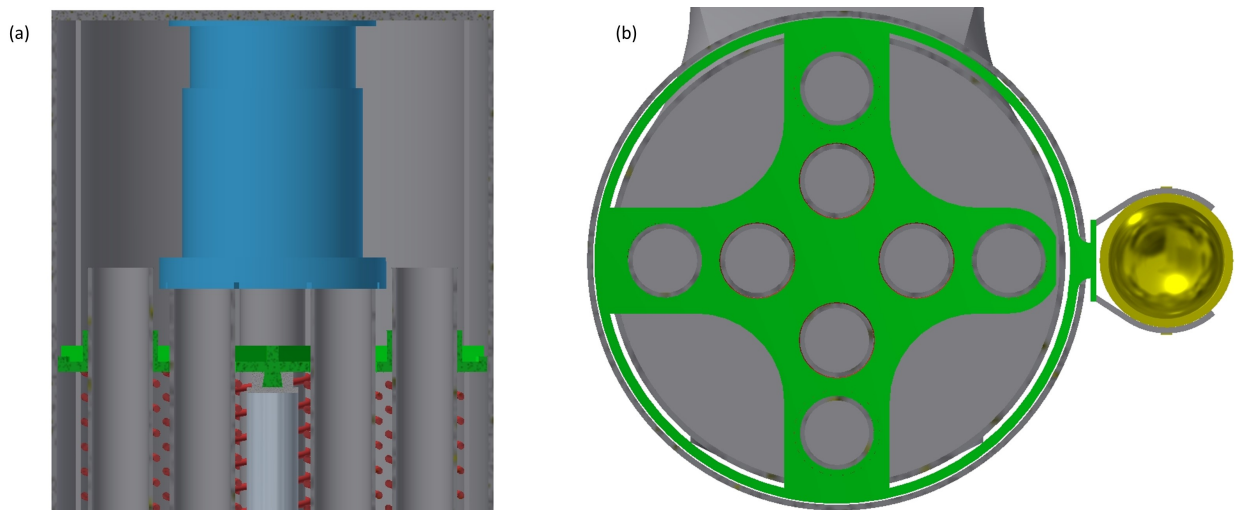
(a) detail of cross-section, (b) top view cross-section
